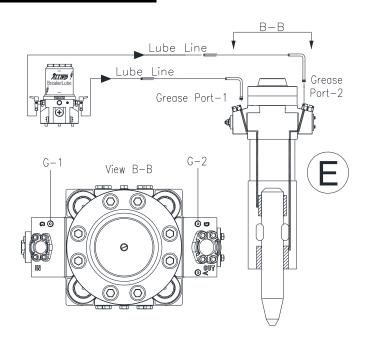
Location of Port 'G' On Valve Housing Identified.
